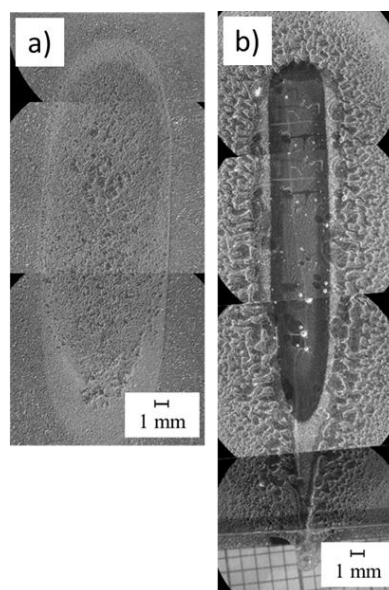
The microstructure of the joints: a) the smallest area joint: 900 W, 450 mm/min, b) the largest area joint: 1100 W, 200 mm/min.
